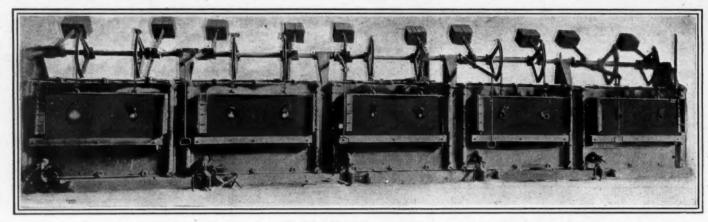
View of the five new casehardening furnaces installed at Warner plant at Toledo
